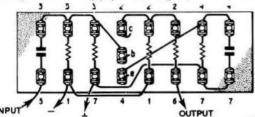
The group board wiring of the simple amplifier modified for printed circuit
